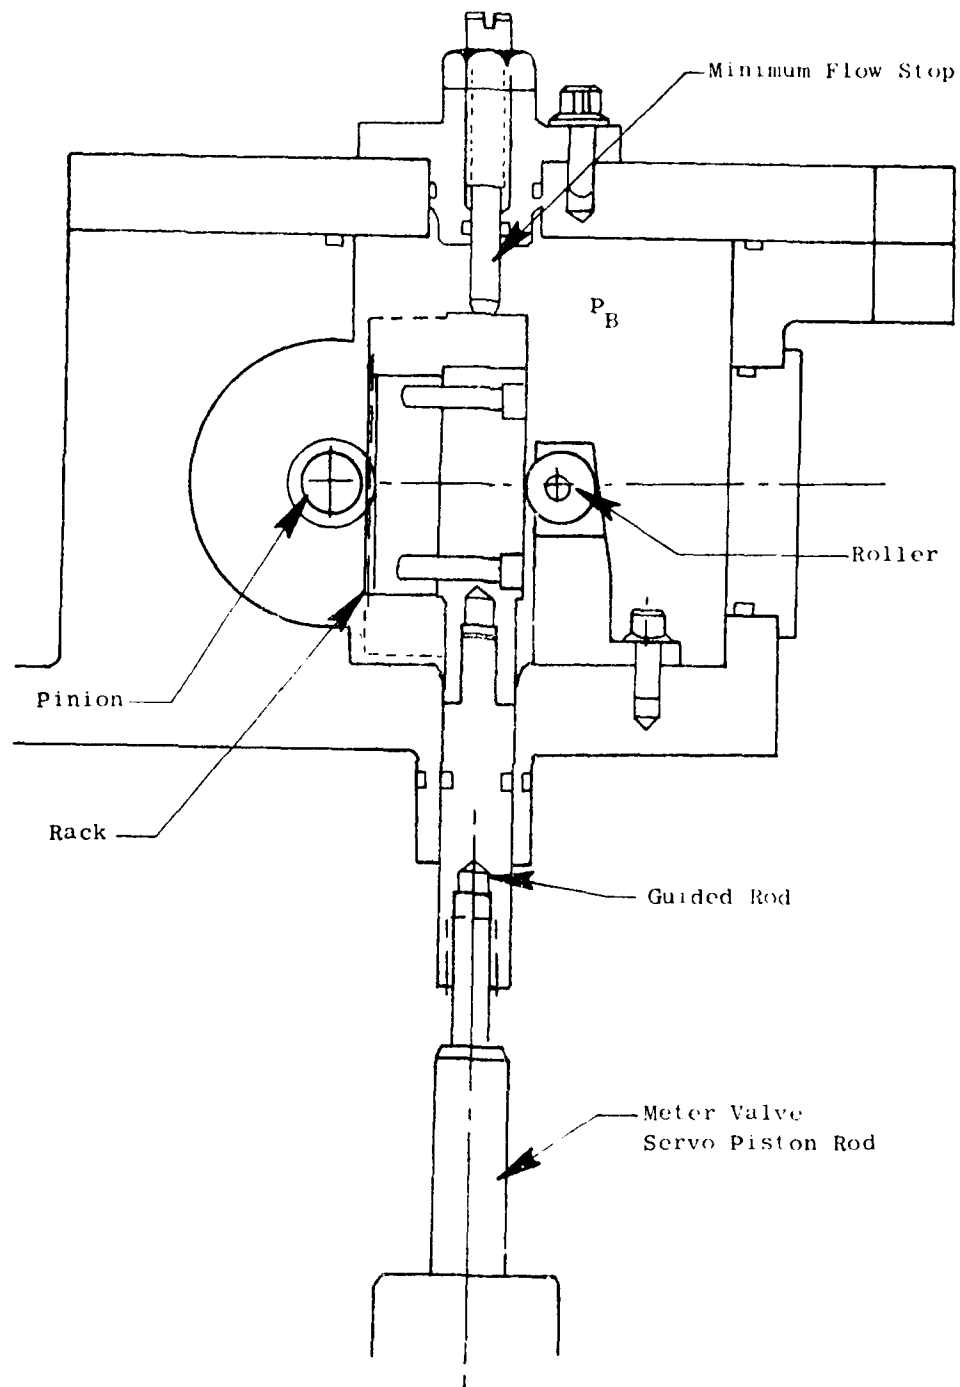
Metering Valve Position Feedback Mechanism at the Fuel Valve.
